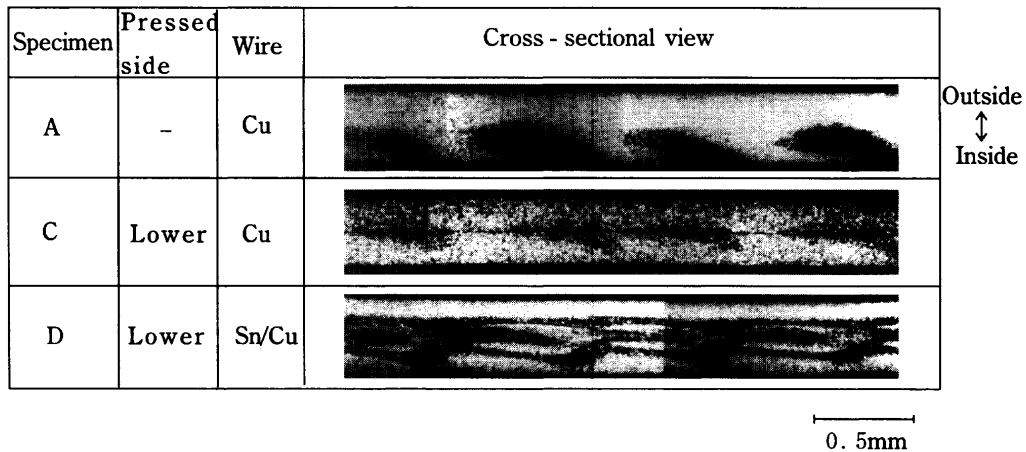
Longitudinal cross section of welded part of TFS.
